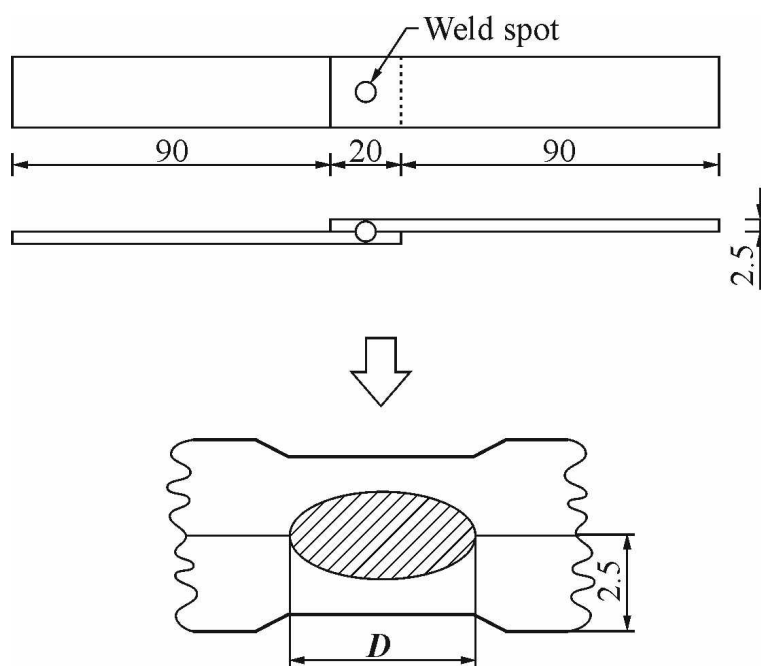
Dimensions of the lap joint specimen produced by resistance spot welding (RSW) for tensile testing
